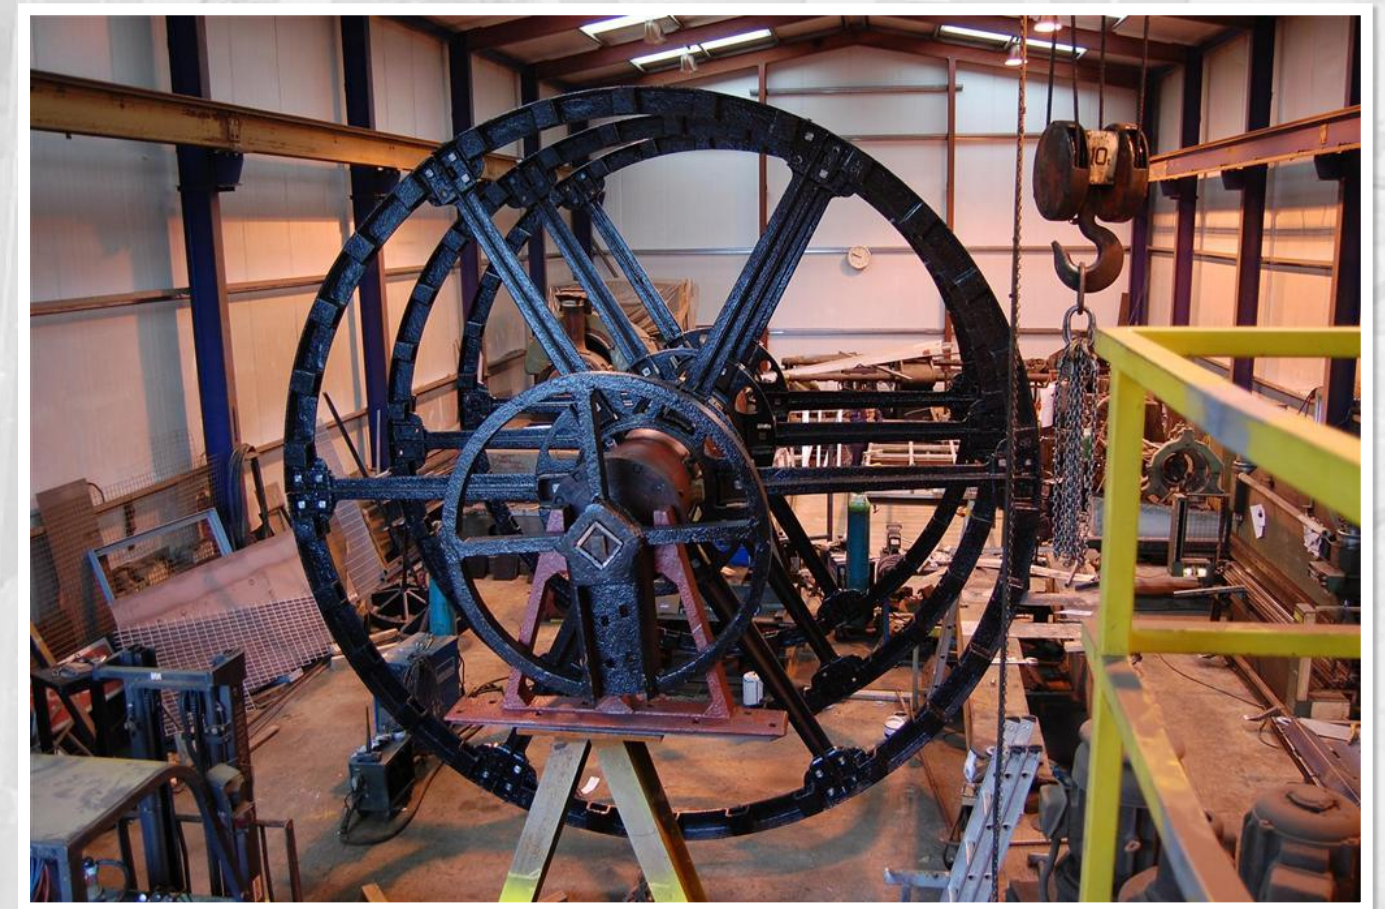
24/09/2010 Repaired Wheel in the workshop fully assembled with crank arms and bearings pedestals, mounted on temporary jig. Painting and decoration underway.
